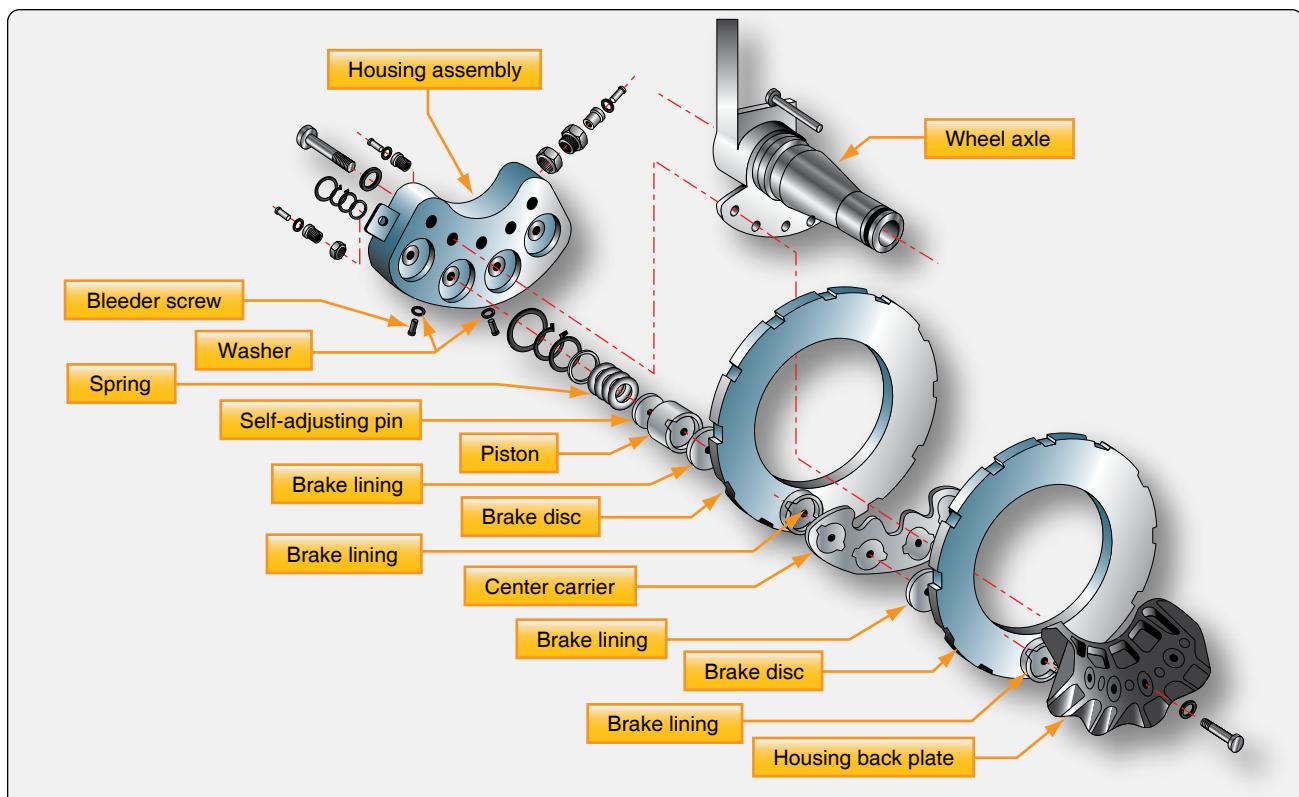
A dual-disc brake is similar to a single-disc brake. It uses a center carrier to hold brake linings against each of the discs.
